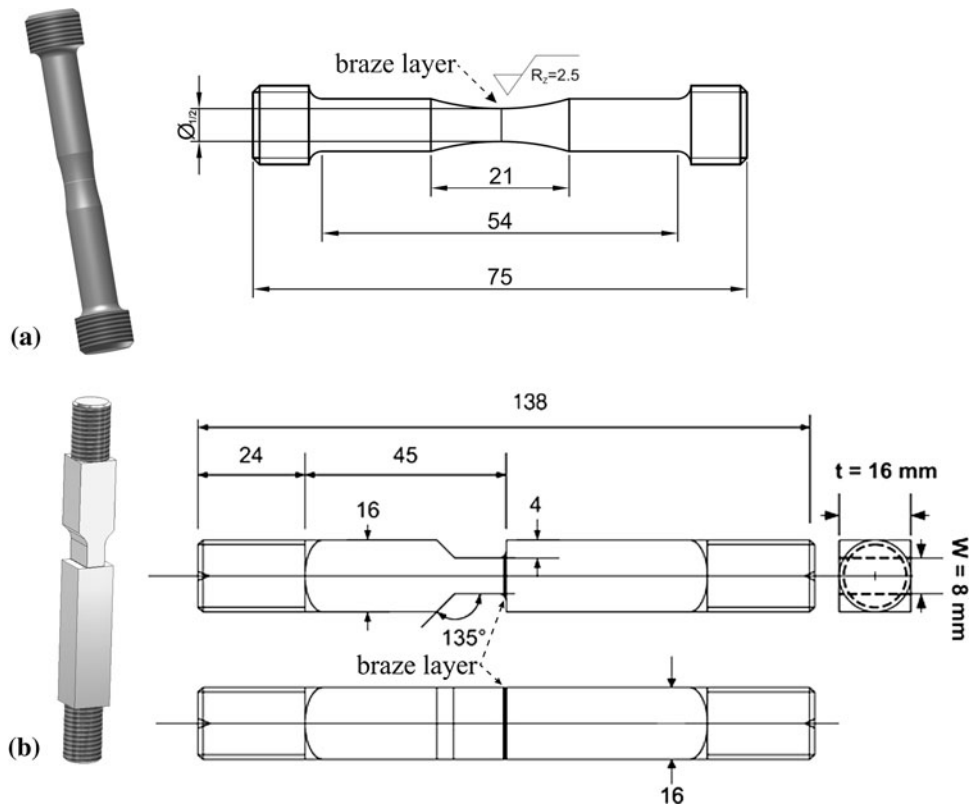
The geometry of (a) the standard round specimens and (b) the T-joint specimen
